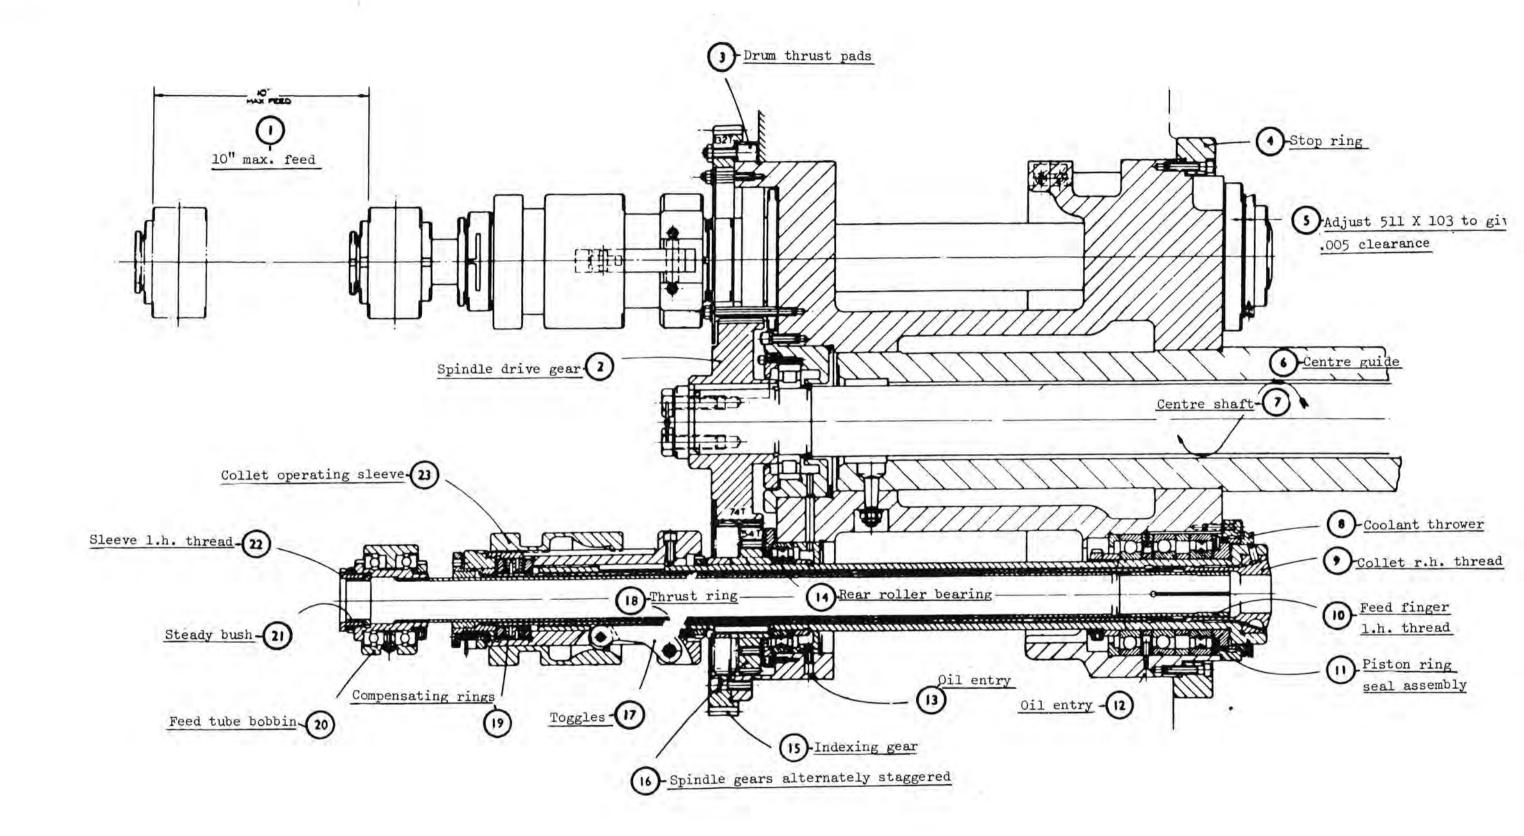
illustrates this end of the centre shaft, with the spindle drive gear keyed to it and the driven gears mounted directly on each work spindle.
